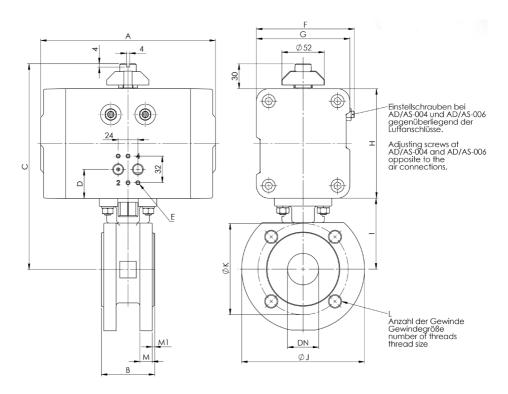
Dimensional drawing Type PKW with actubar type AD-018 (exemplary presentation)
